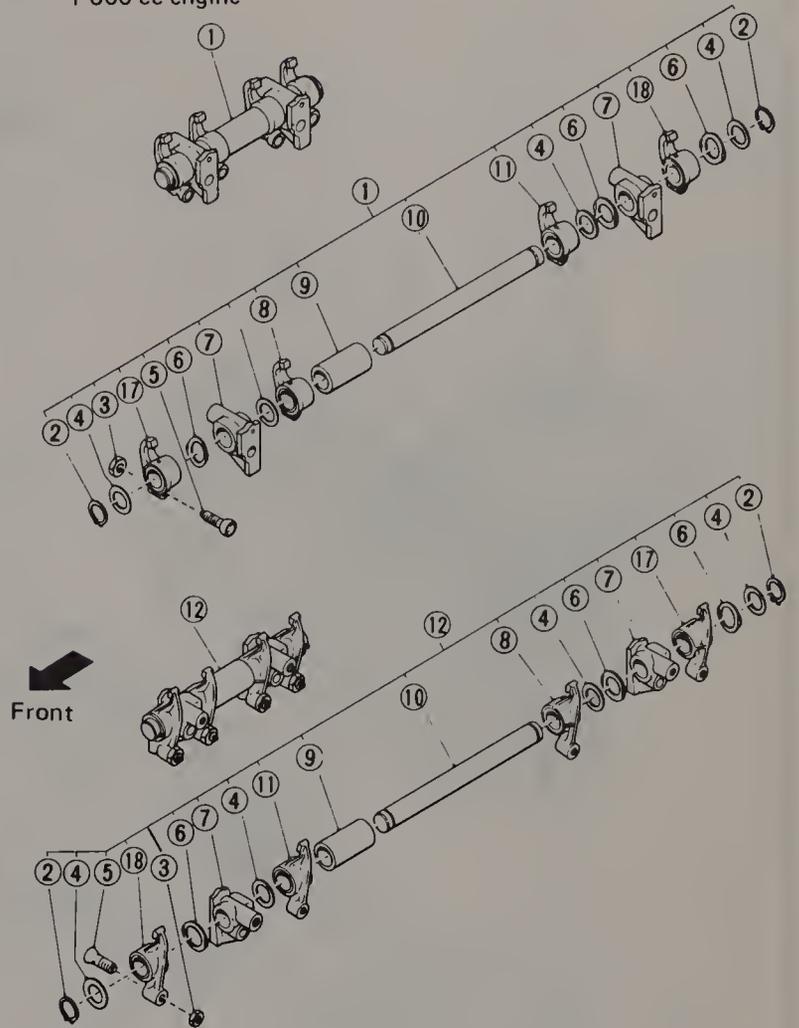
Rocker arm shaft components – exploded view (Sec 11)
